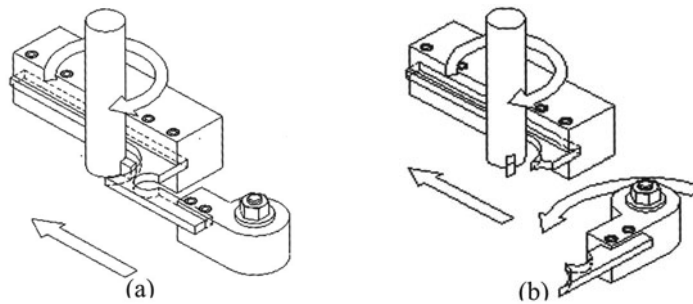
Geometry of the milling quick-stop, (a) prior to fracture, (b) after fracture
